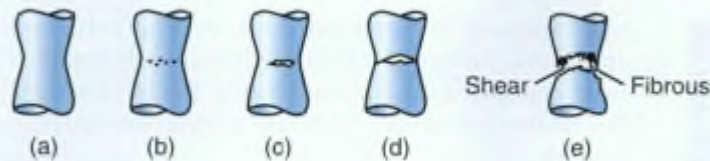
Sequence of events in the necking and fracture of a tensile-test specimen: (a) early stage of necking; (b) small voids begin to form within the necked region; (c) voids coalesce, producing an internal crack; (d) the rest of the cross-section begins to fail at the periphery, by shearing; and (e) the final fracture, known as a cup- (top fracture surface) and cone- (bottom surface) fracture, surfaces.
